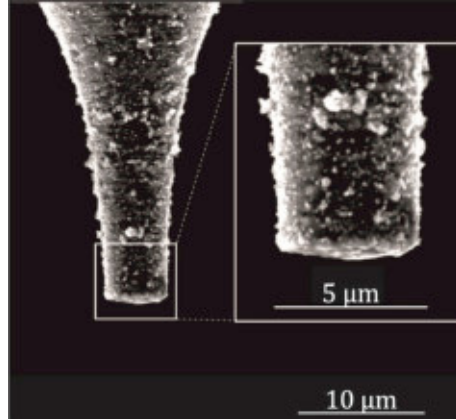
A 4 μm micro-grinding tool (Reprinted with permission from [29])
